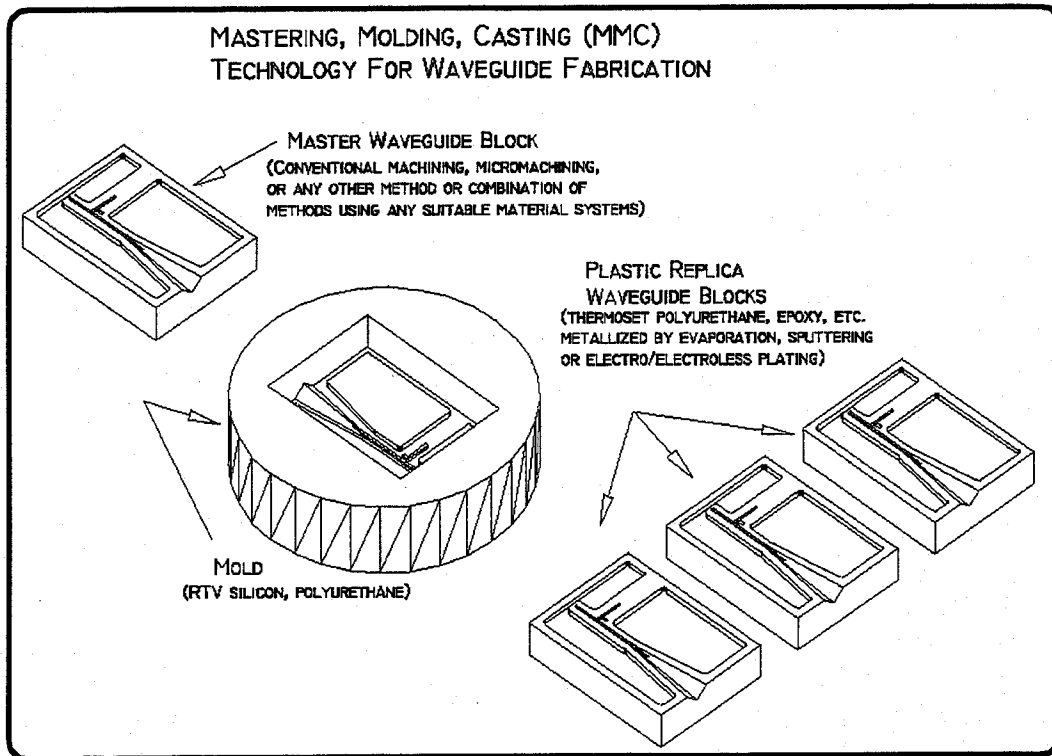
The basic principle of fabricating split-block components by the method of Mastering, Molding and Casting (MMC).
